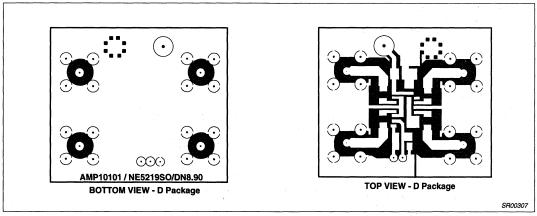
VGA AC Evaluation Board Layout (SO Package)
